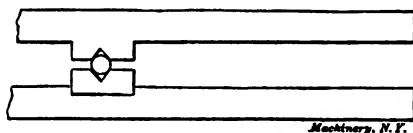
Part of Jig with Pivoted Leaf, Showing Method of Holding Round Work
